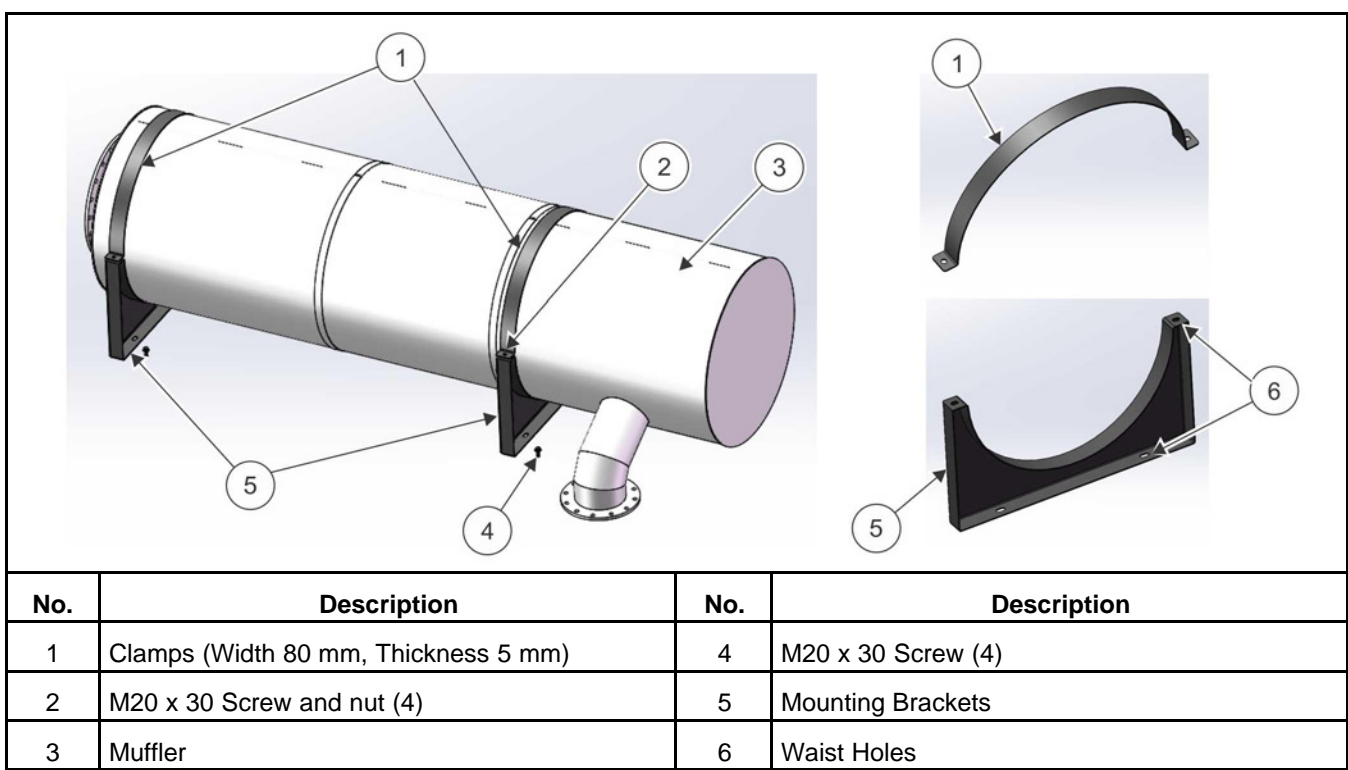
MUFFLER ASSEMBLY INSTALLATION (4 IN 1)
